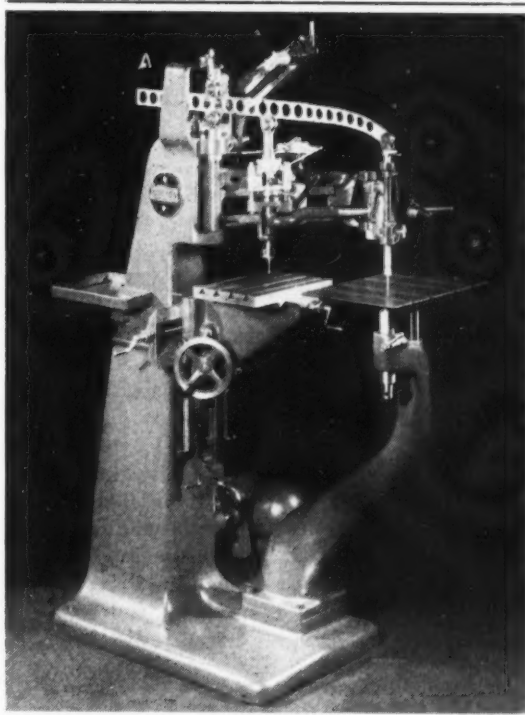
Gorton Three-dimensional Machine for Cutting Dies and Molds from Templates
